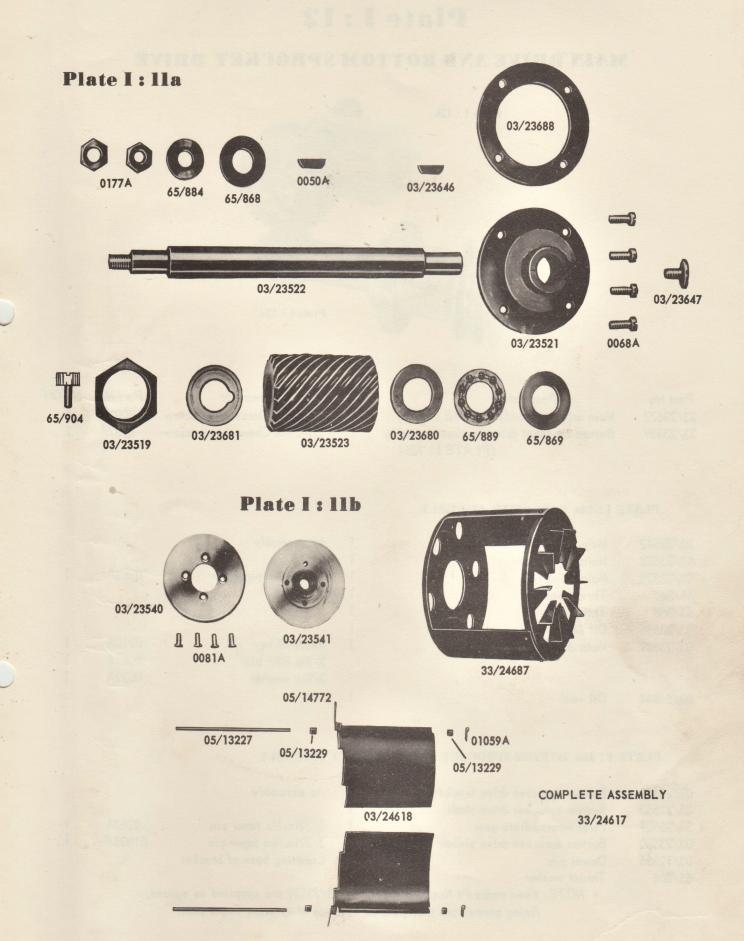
SHUTTER WITH SHAFT AND GEAR
